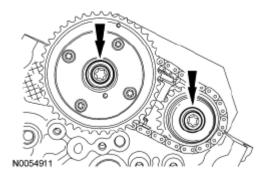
Locating LH Secondary Timing Assembly Courtesy of FORD MOTOR CO.
